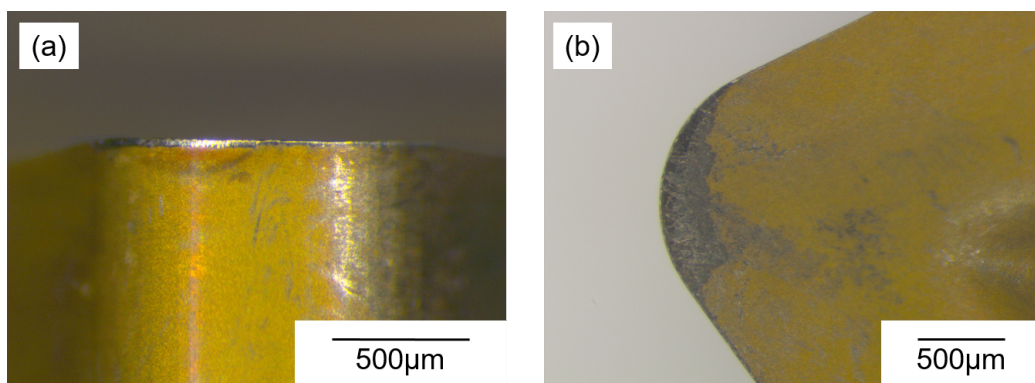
Example tool wear produced during face turning of face 4 of billet 4_1. The tool shown was used during the 3rd repeat of face 4. The tool shown is representative of all passes performed on face 4.
